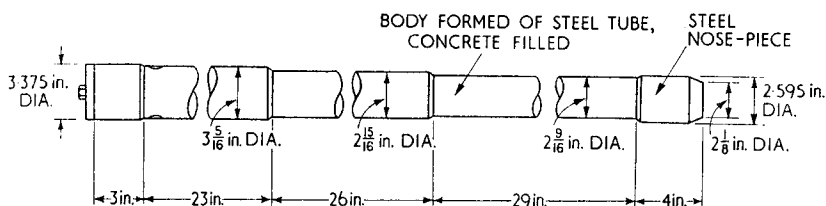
Detail of a plug for a typical stepped hole through a reactor shield. All dimensions are in inches. The stepped hole liner into which the plug fits has a diameter larger by $\frac{1}{16}$ inch.
